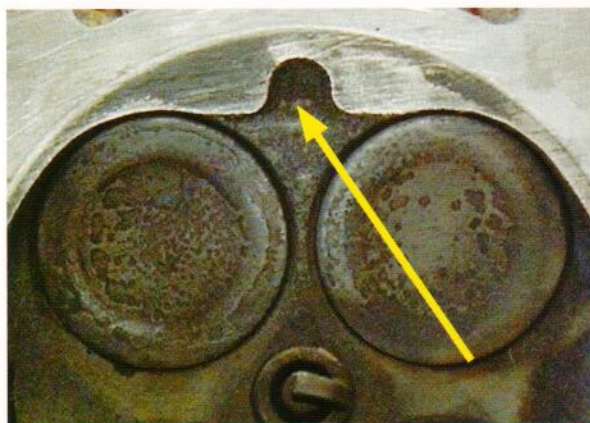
An indication of previous skimming often comes from looking at the dimpled recess in the combustion chamber. This head has not been modified.
